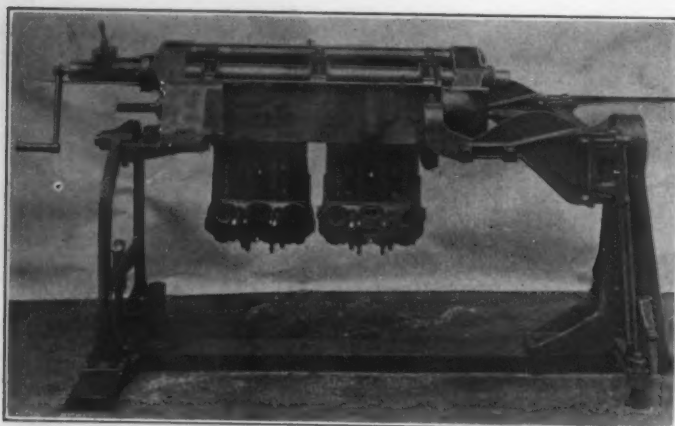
SIDE VIEW OF ENGINE-STAND AND MAIN-BEARING BORING-FIXTURE
